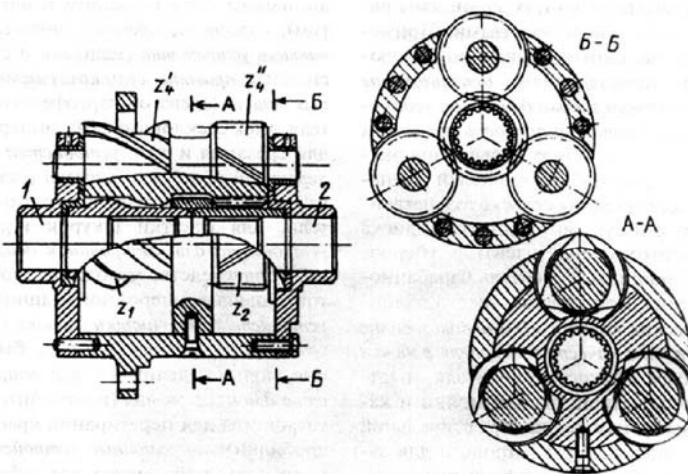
Locking differential of a KamAZ with rim gearing
